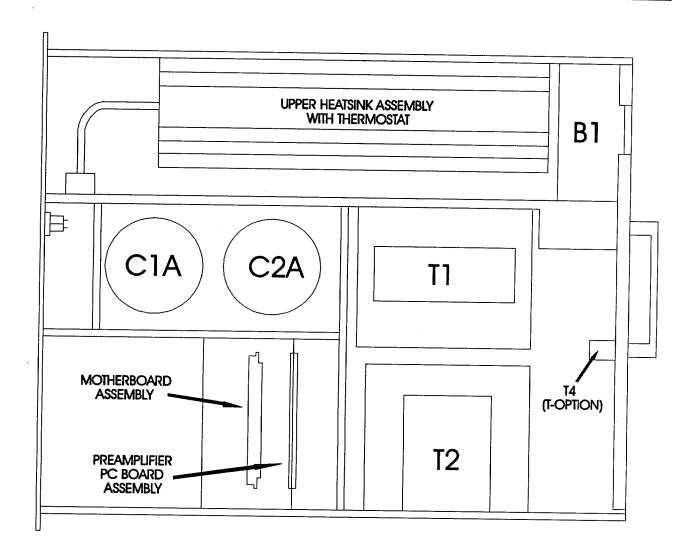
Model 1751SLE (Top View, Cover Removed)
